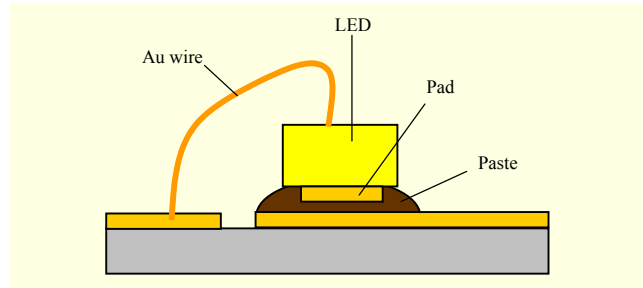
Cross-sectional view of LED bonding package with both conductive pastes.
